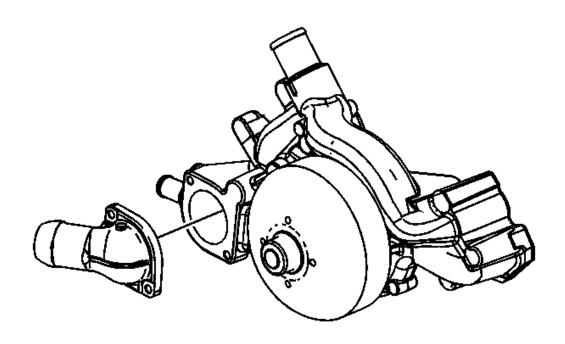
View Of Water Pump Courtesy of GENERAL MOTORS CORP.
